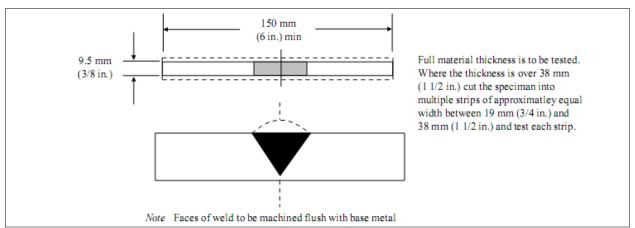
Test No.2 – Guided Bend Test for Side Bend (Plate or Pipe)
